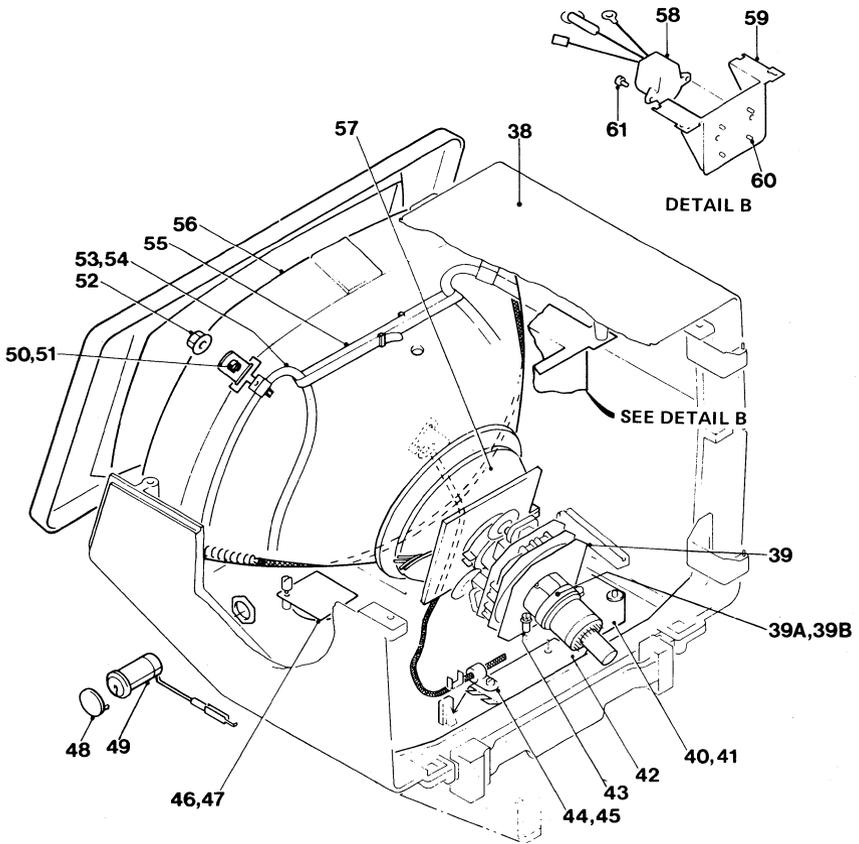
(Sheet 3 of 4). Front Enclosure Assembly
